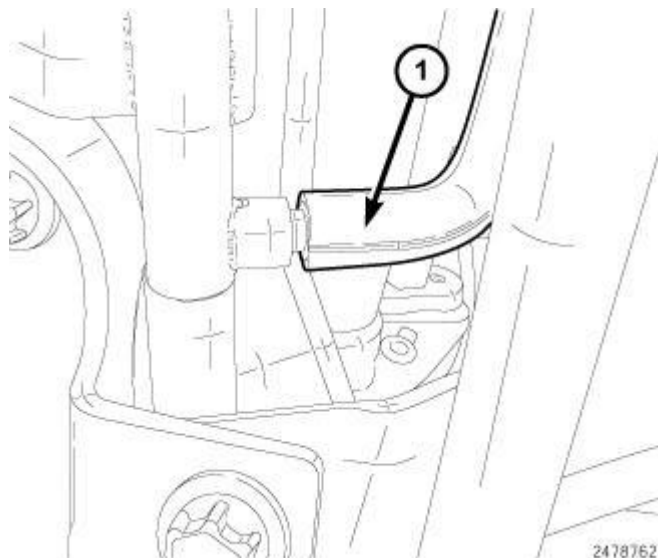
EGR Tube Gasket Onto EGR Actuator
